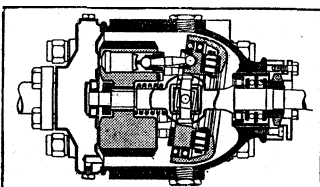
SECTION OF ONE ELEMENT OF THE JANNEY-WILLIAMS HYDRAULIC VARIABLE GEAR
